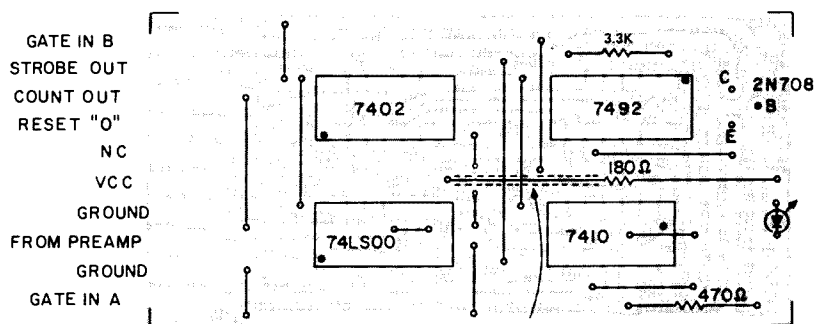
(b). GCU component layout. Use sleeving to insulate resistor lead. 1 board per counter. Dot indicates pin 1.
